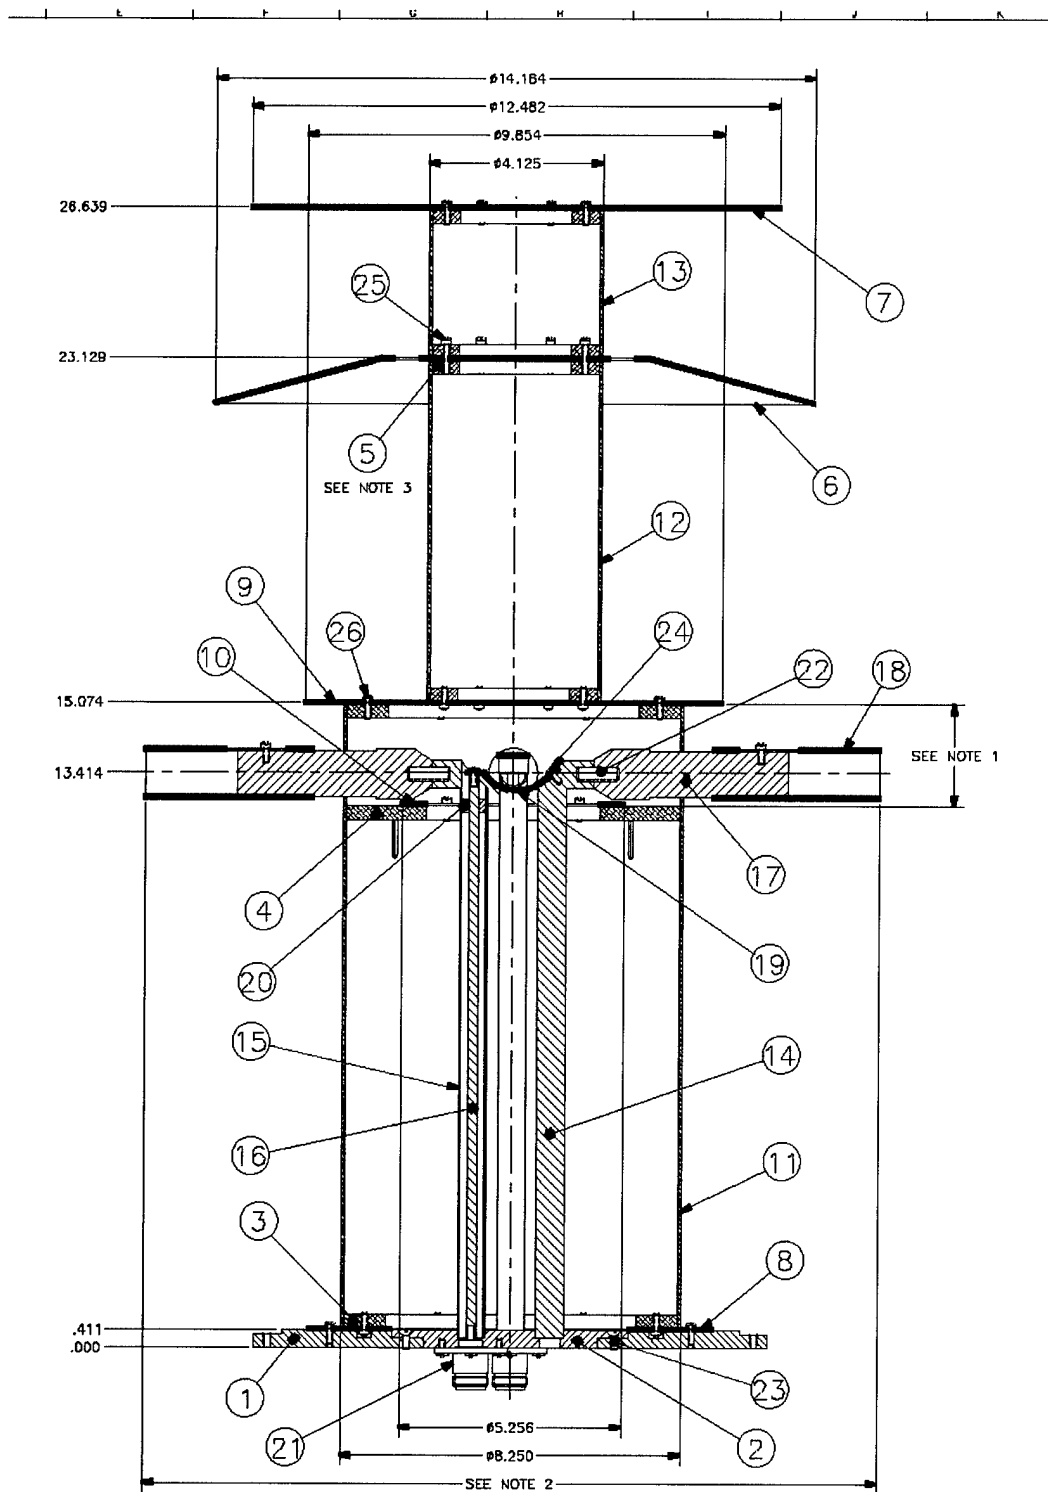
Drawing of GBT 290 to 395 MHz feed. Dimensions are in inches. From NRAO Drawing D35241A012.
